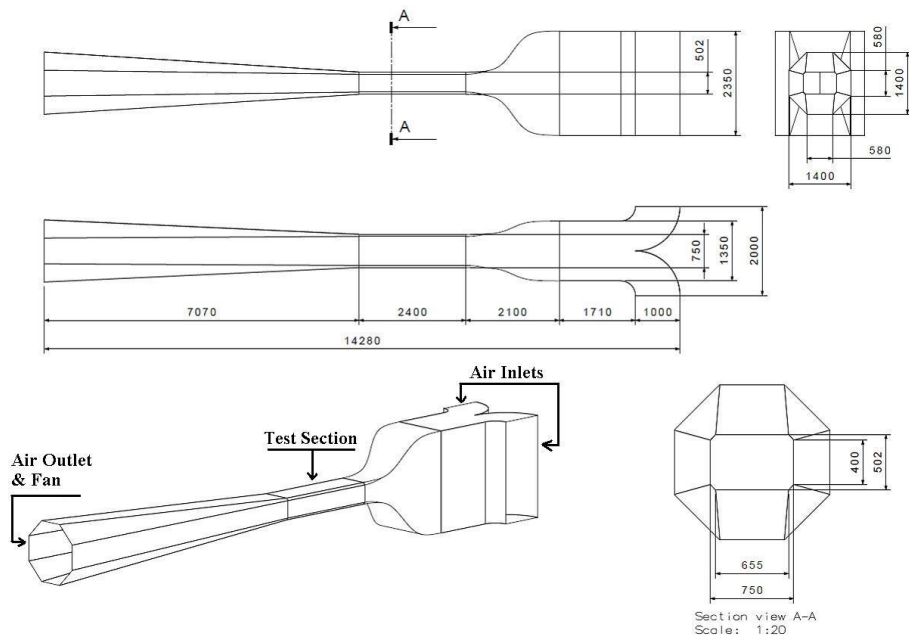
Technical drawing of the wind tunnel in the Mechanical Engineering
